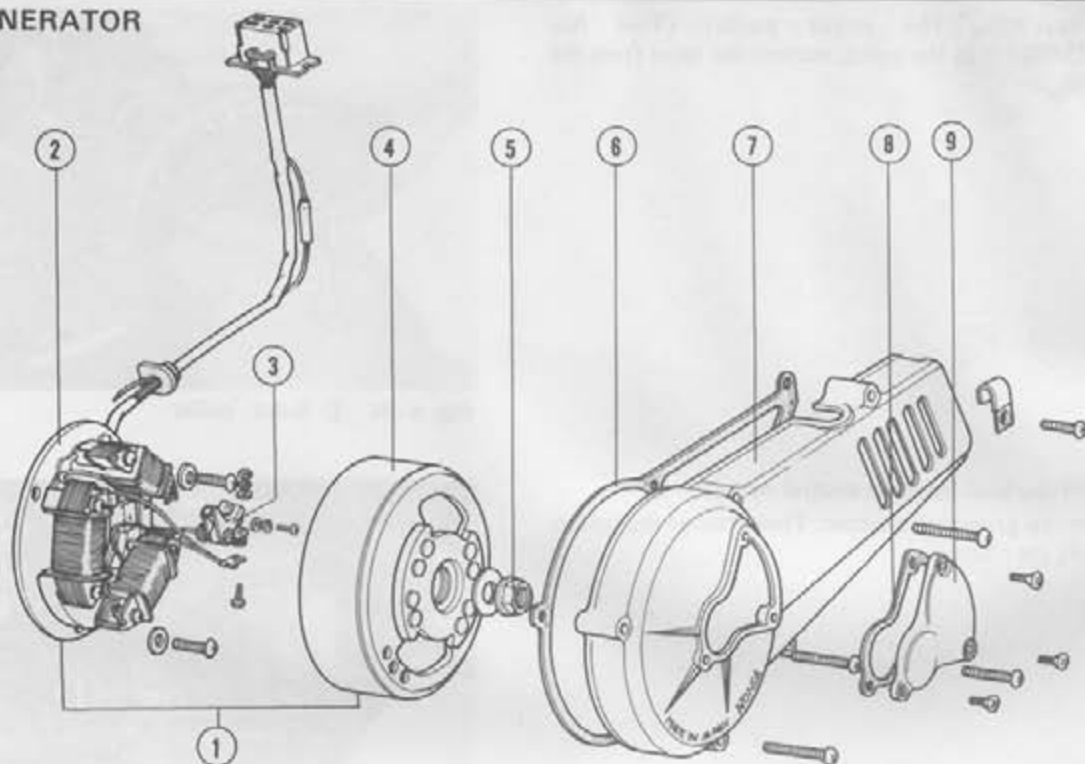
① A.C. generator assy ⑥ Left crankcase cover gasket
